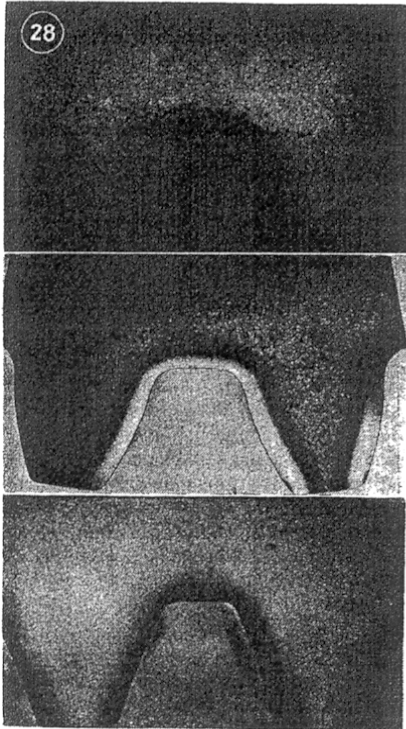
Sections through reduction gear teeth driving gear, pinion and sun gear.
